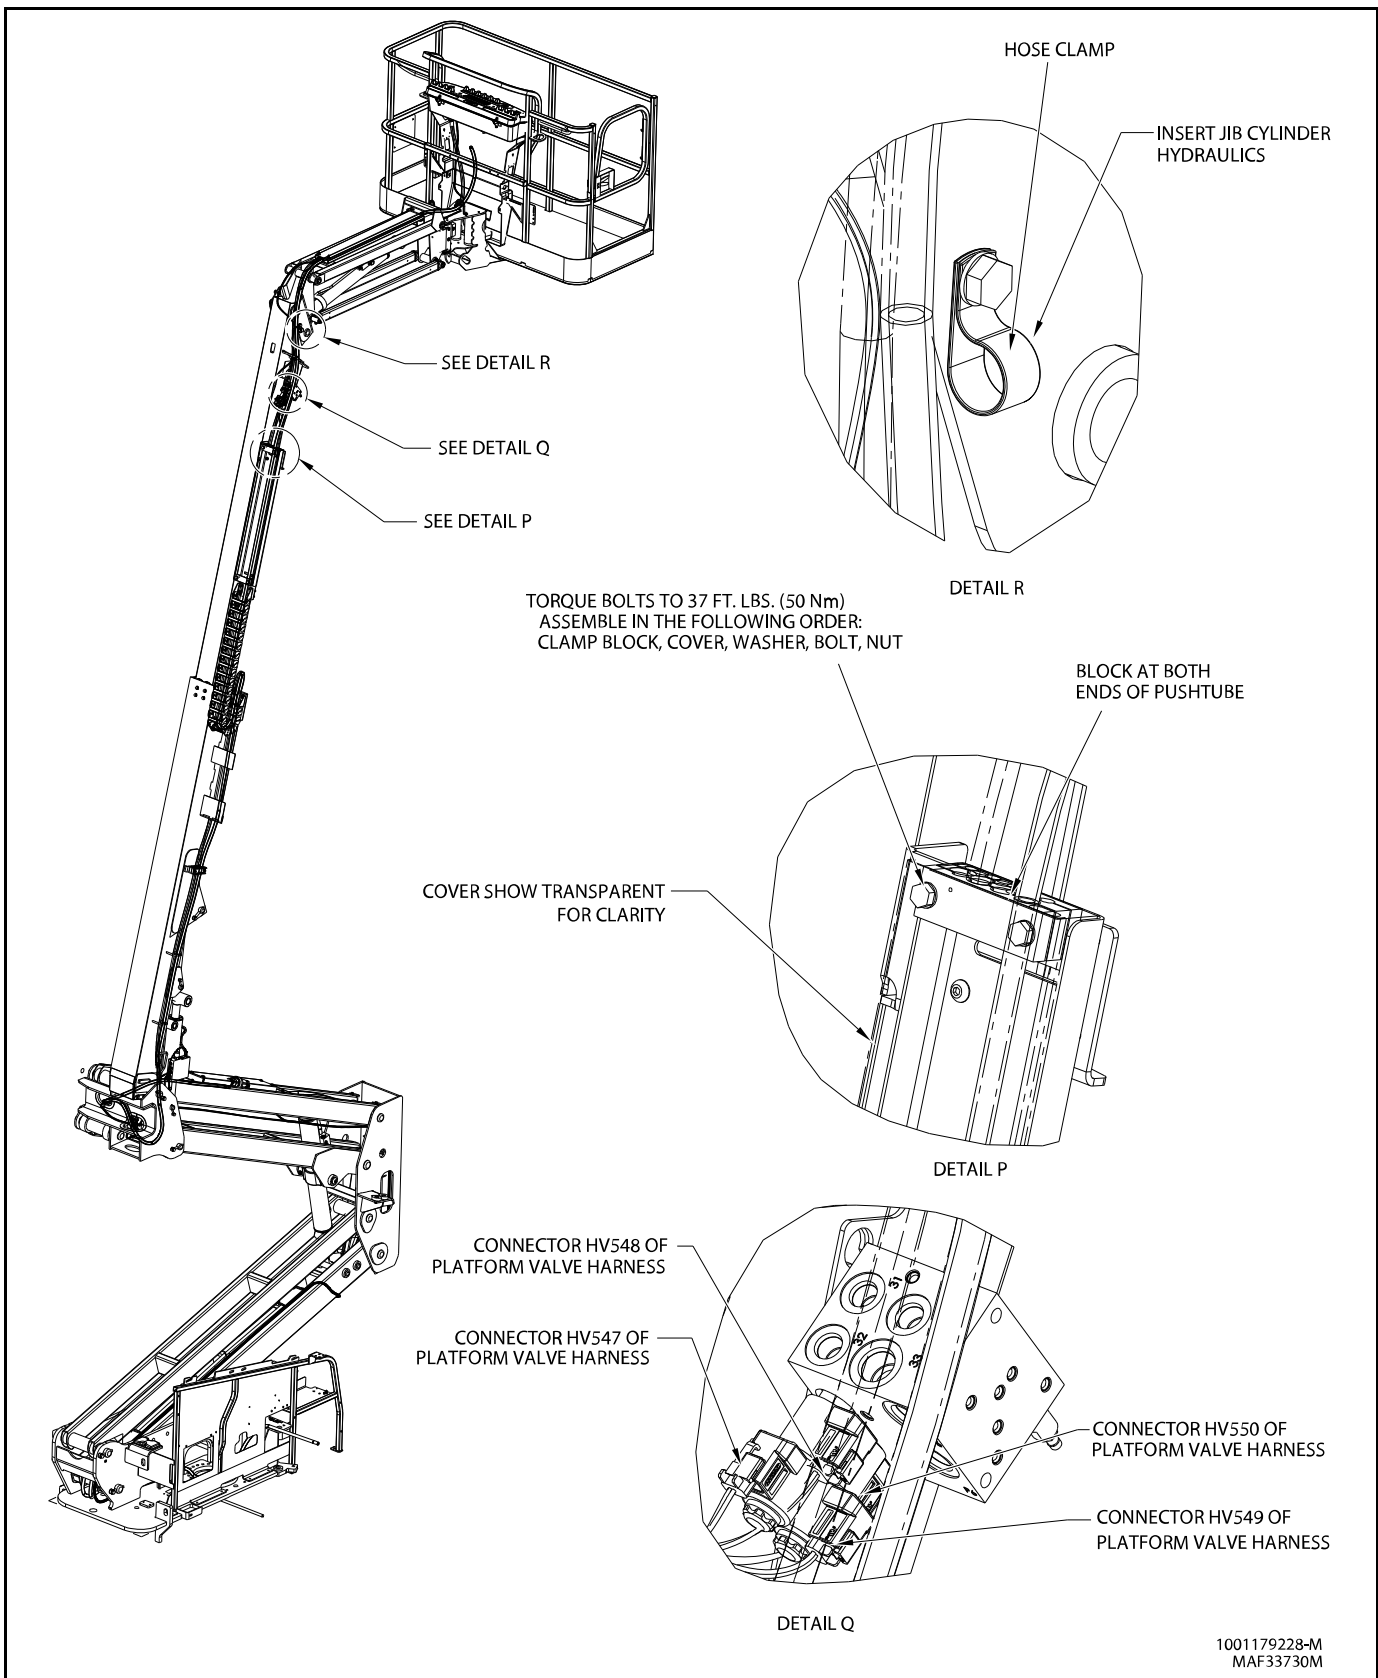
Cables and Clamps Installation - Sheet 6 of 8
